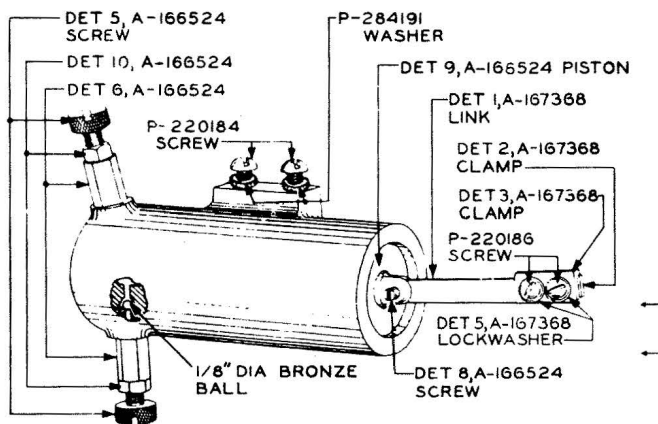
Mounting Parts for Det 159, A-166520 Magnet (Solenoid)
